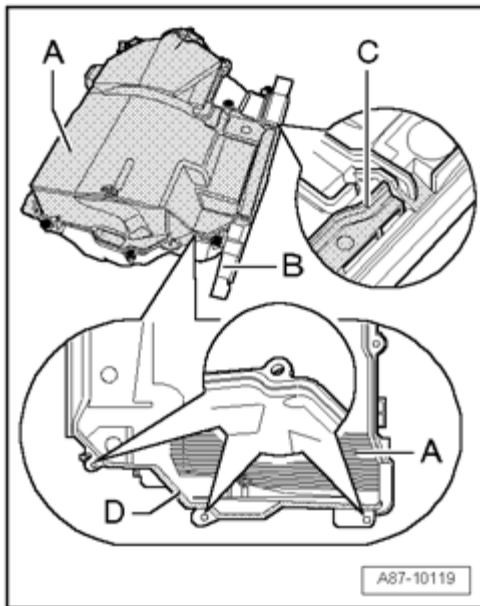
Inserting Sealing Cord (Dimension 2 X 2 Mm) Into Groove Of Upper Cover Or Seal Groove/Spring Joint On Housing
